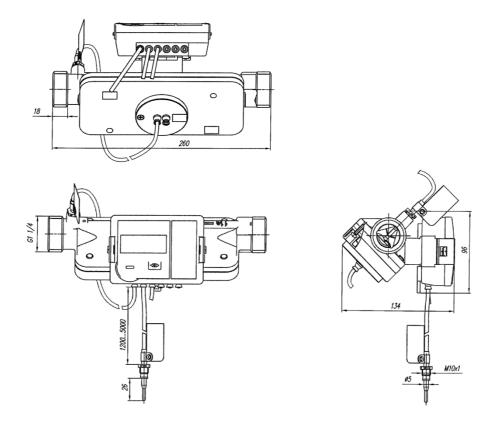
Threaded end connections G1 1/4", mounting lenght L=260 mm
